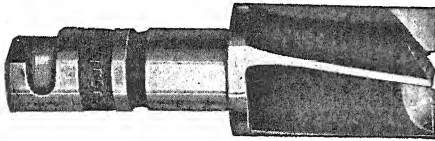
A Side View of an Eclipse Standard Counterbore Cutter with Shank Interchangeable in the Holder.
